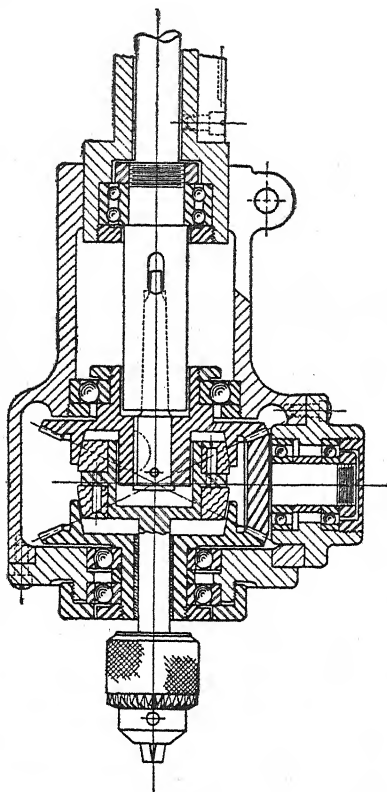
A Sectional View of the Avey Drilling Machine Co. No. 1 Tapping Attachment Designed for Light Tapping at High Speeds.
